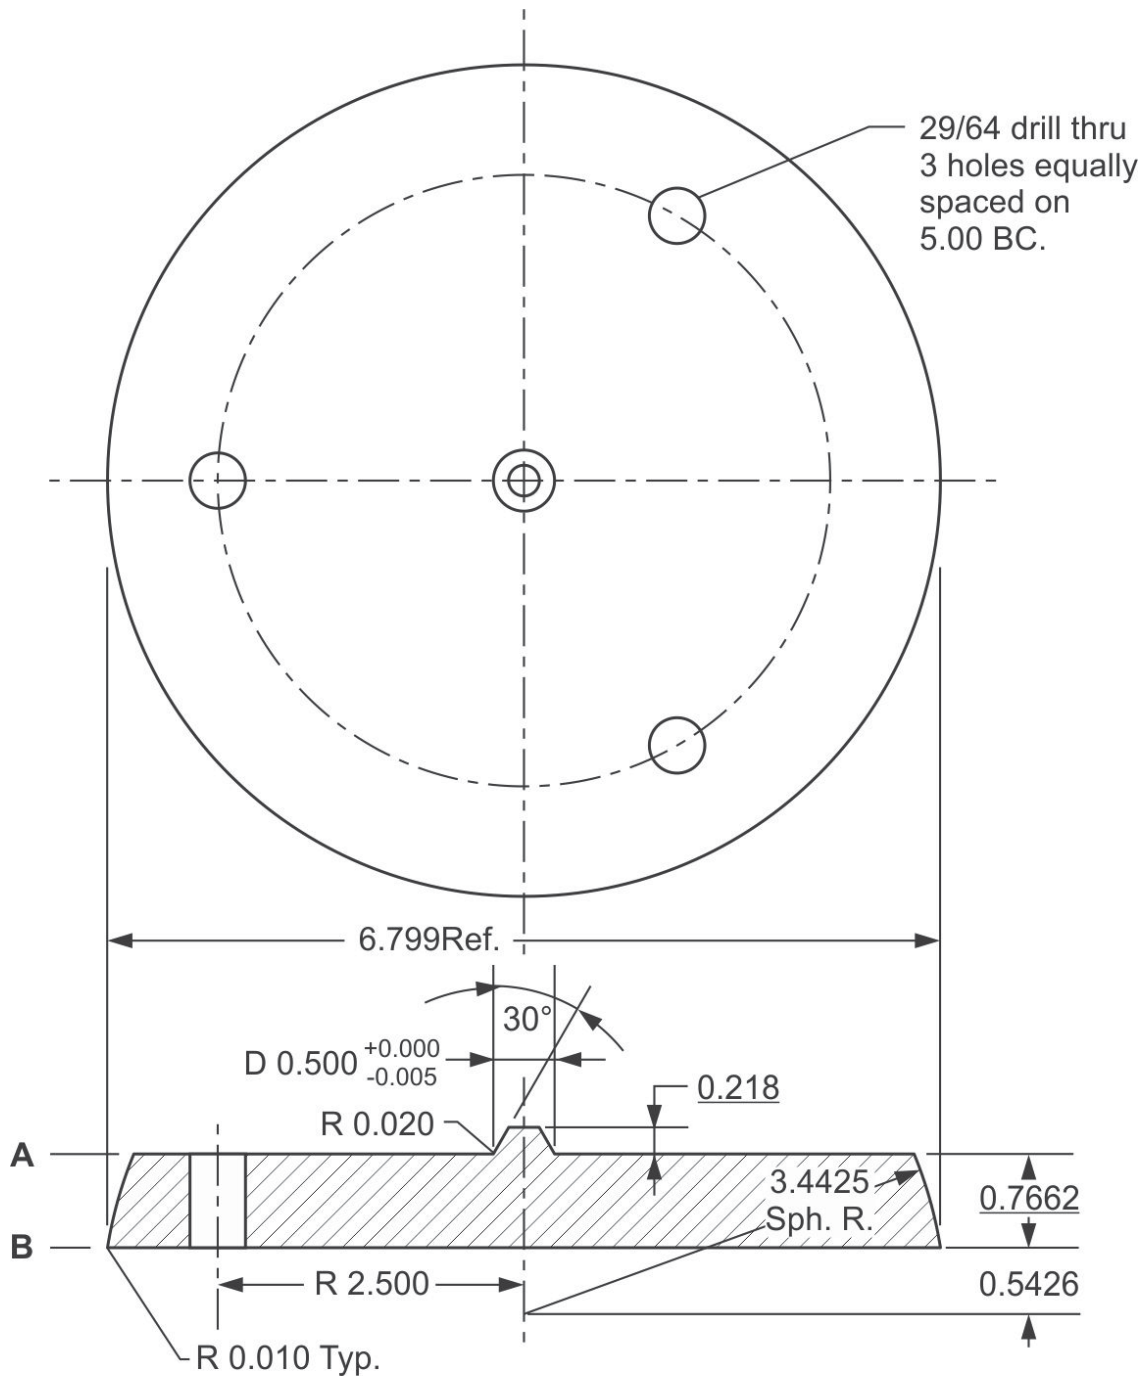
Lower Plate of 3.4425-in.-nominal-radius (3.4420-in.-average-radius) Sphere.^a
